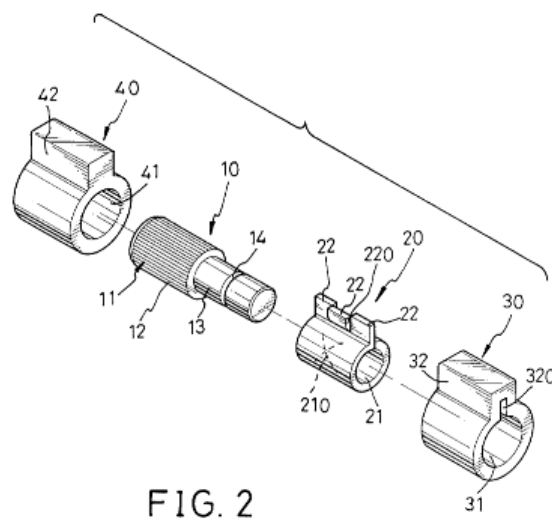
A drawing from the US5950281A patent [24]. The shape of the clip helps to obtain equal torque in both turning directions.
